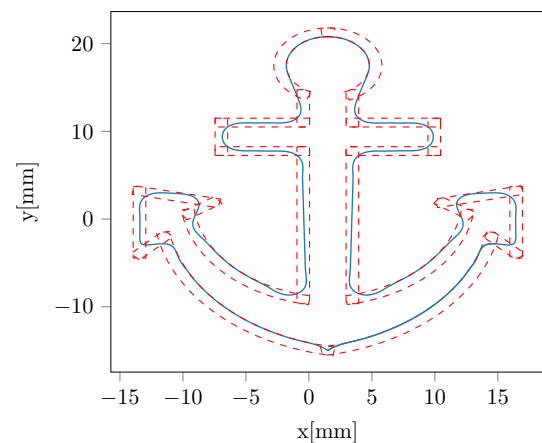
Anchor-shaped workpiece - machine tool trajectories
